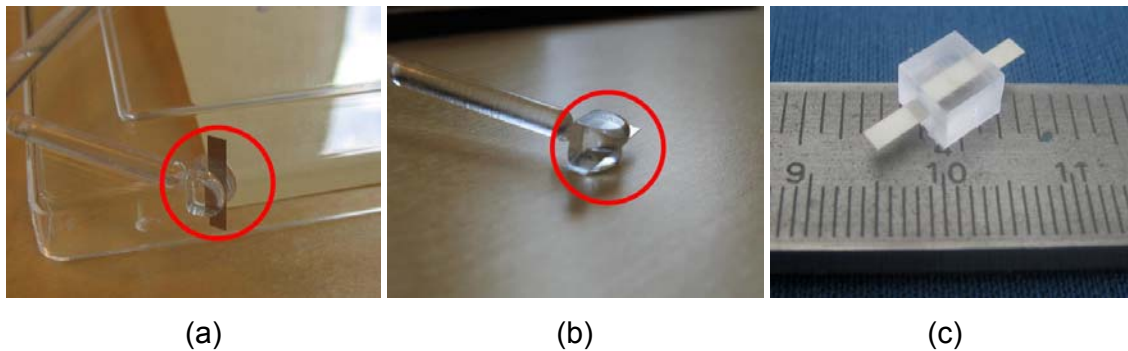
Weld lines formation due to the presence of an insert in the cavity during insert moulding (a)(b) and complete insert moulded part (c) (see section 7.2.3 for manufacturing description).
